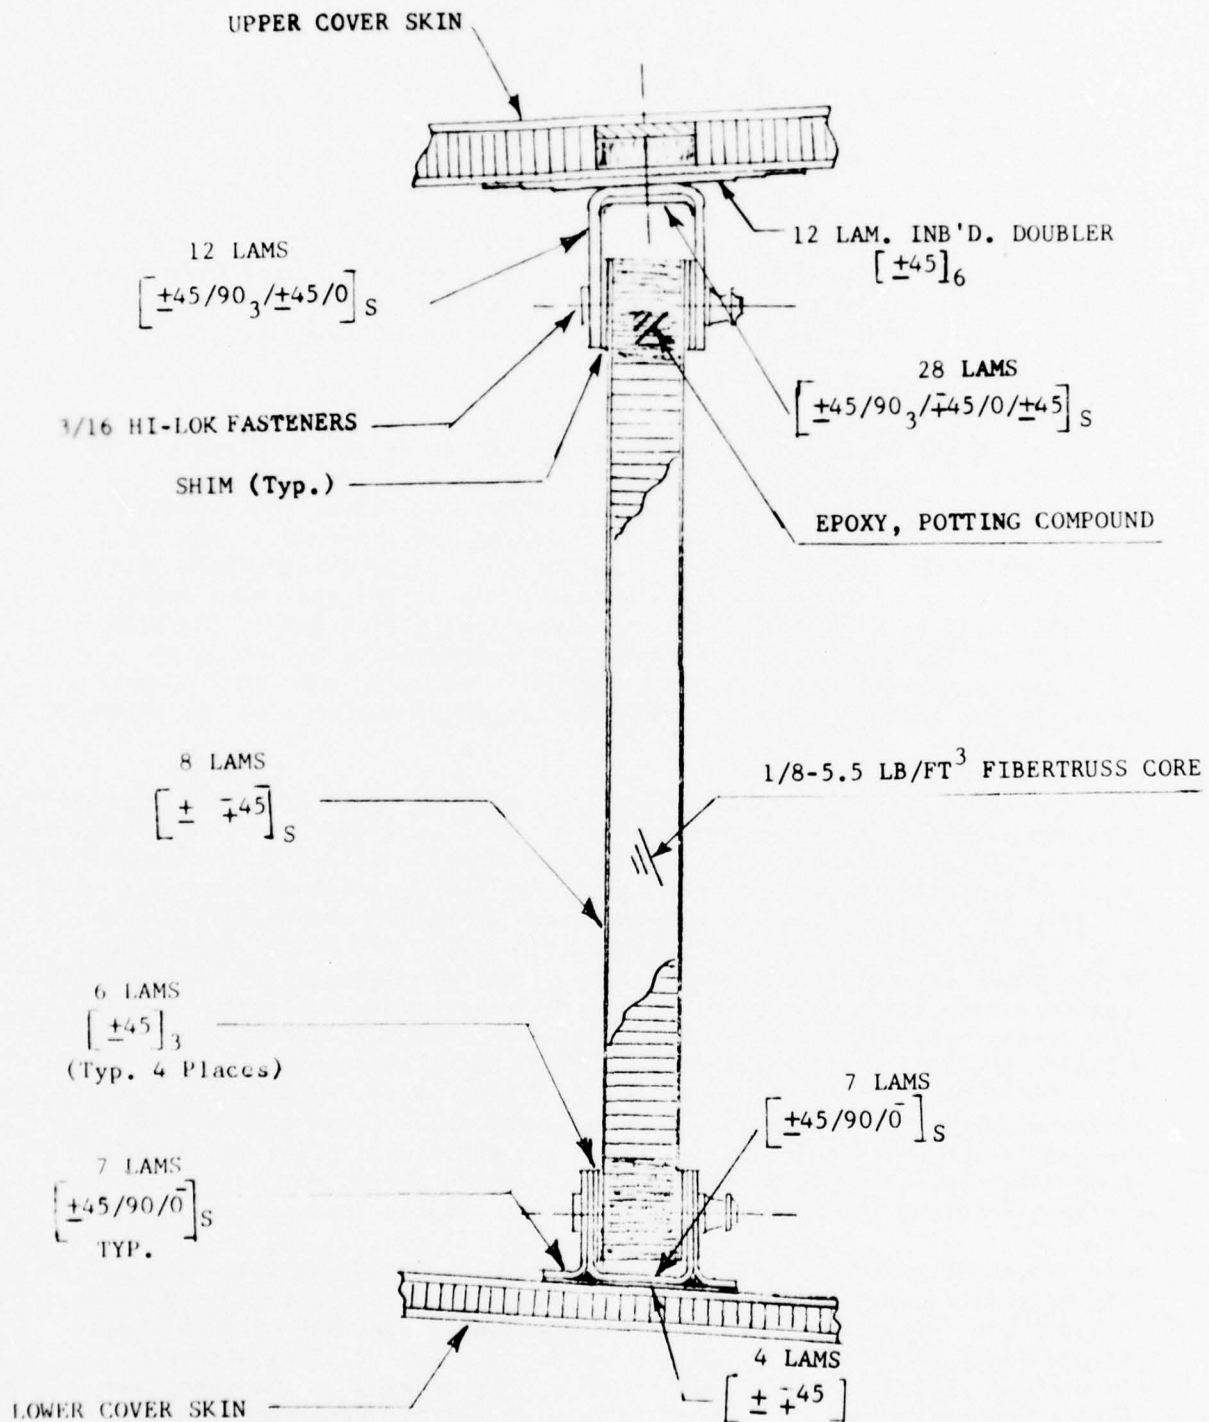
TYPICAL INTERMEDIATE SPAR SECTION
